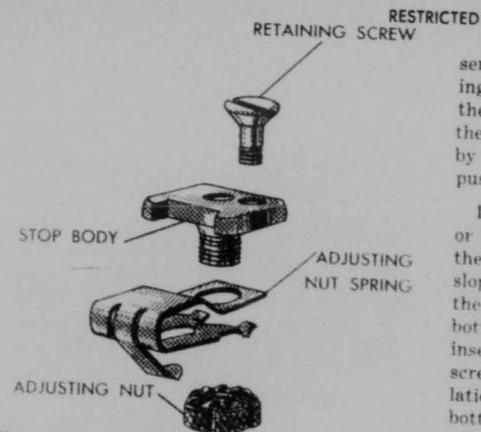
Trigger Bar Adjustable Stop Assembly—Exploded View.
